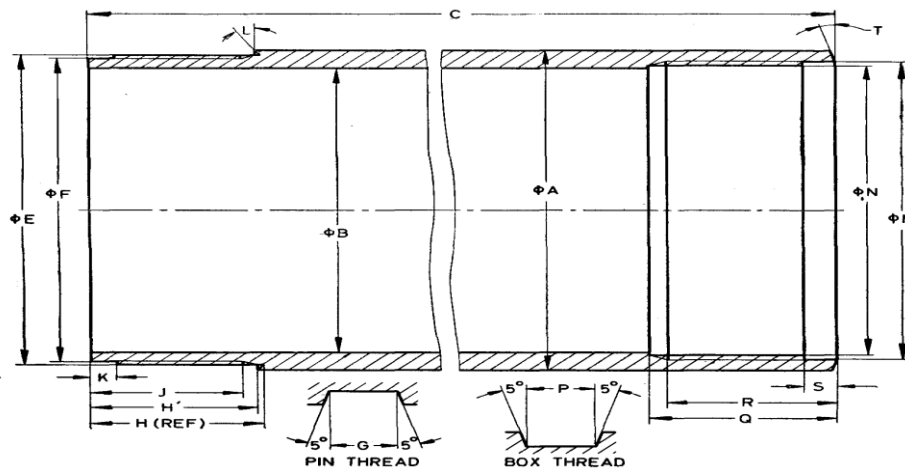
'WF' DESIGN DOUBLE TUBE CORE BARREL — OUTER TUBE
